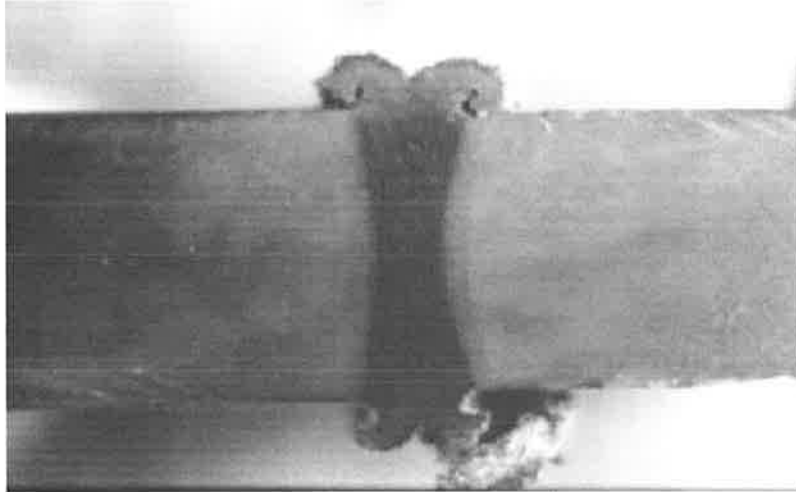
Macrophotograph of equal diameter friction welded steel joint [42].
